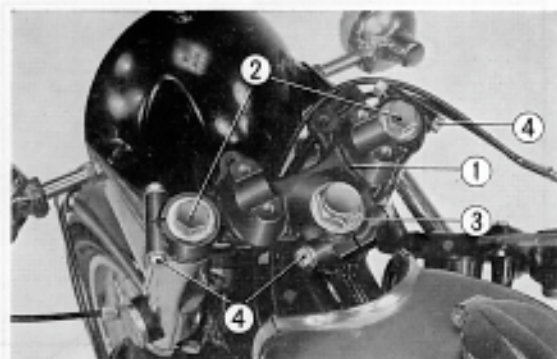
① Fork top bridge ② Fork top bolts ③ Stem nut ④ 8mm bolts
